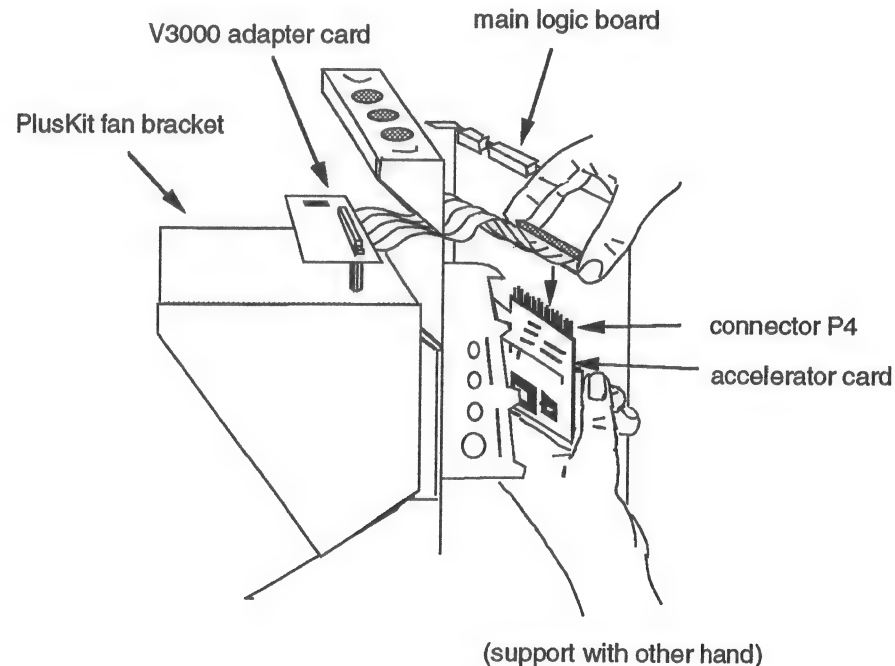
Connecting adapter card to accelerator expansion port P4
